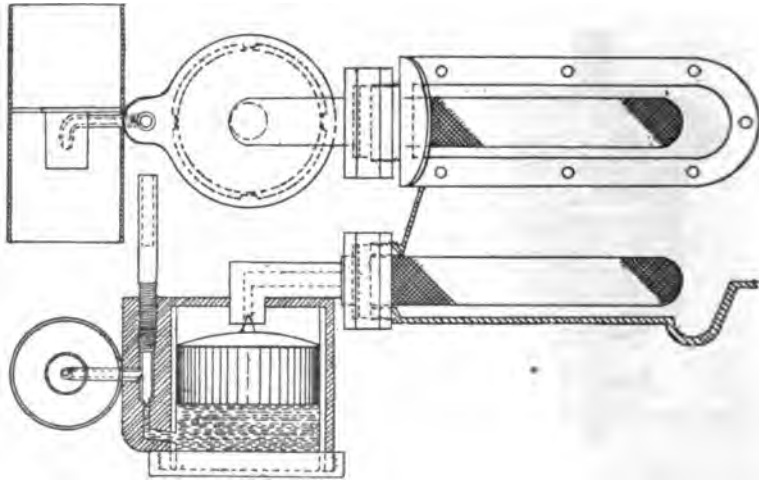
The Duryea Float Feed Carburettor or Sprayer.
